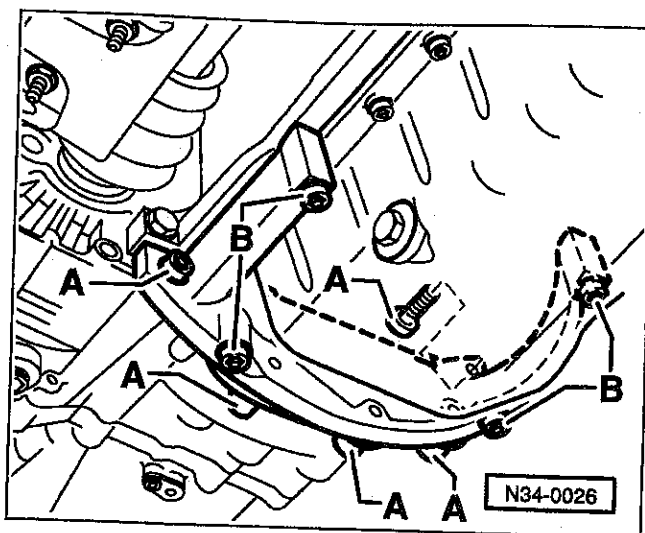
Transmission assembly mounts to be used in conjunction with Table b.
